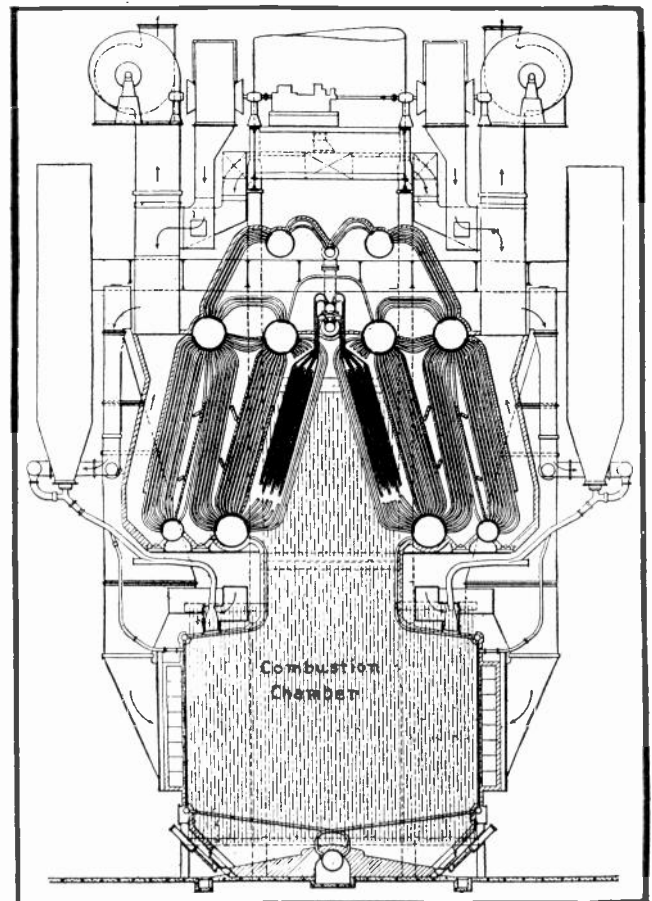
Another type of large modern power plant boiler showing the combustion chamber, boiler tubes, super-heater, draft fans, etc.
